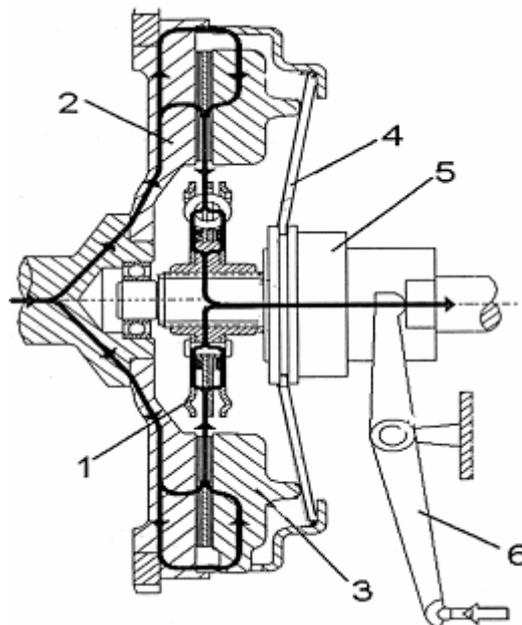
7 Schematic Diagram of Pull-type Clutch Working Principle
